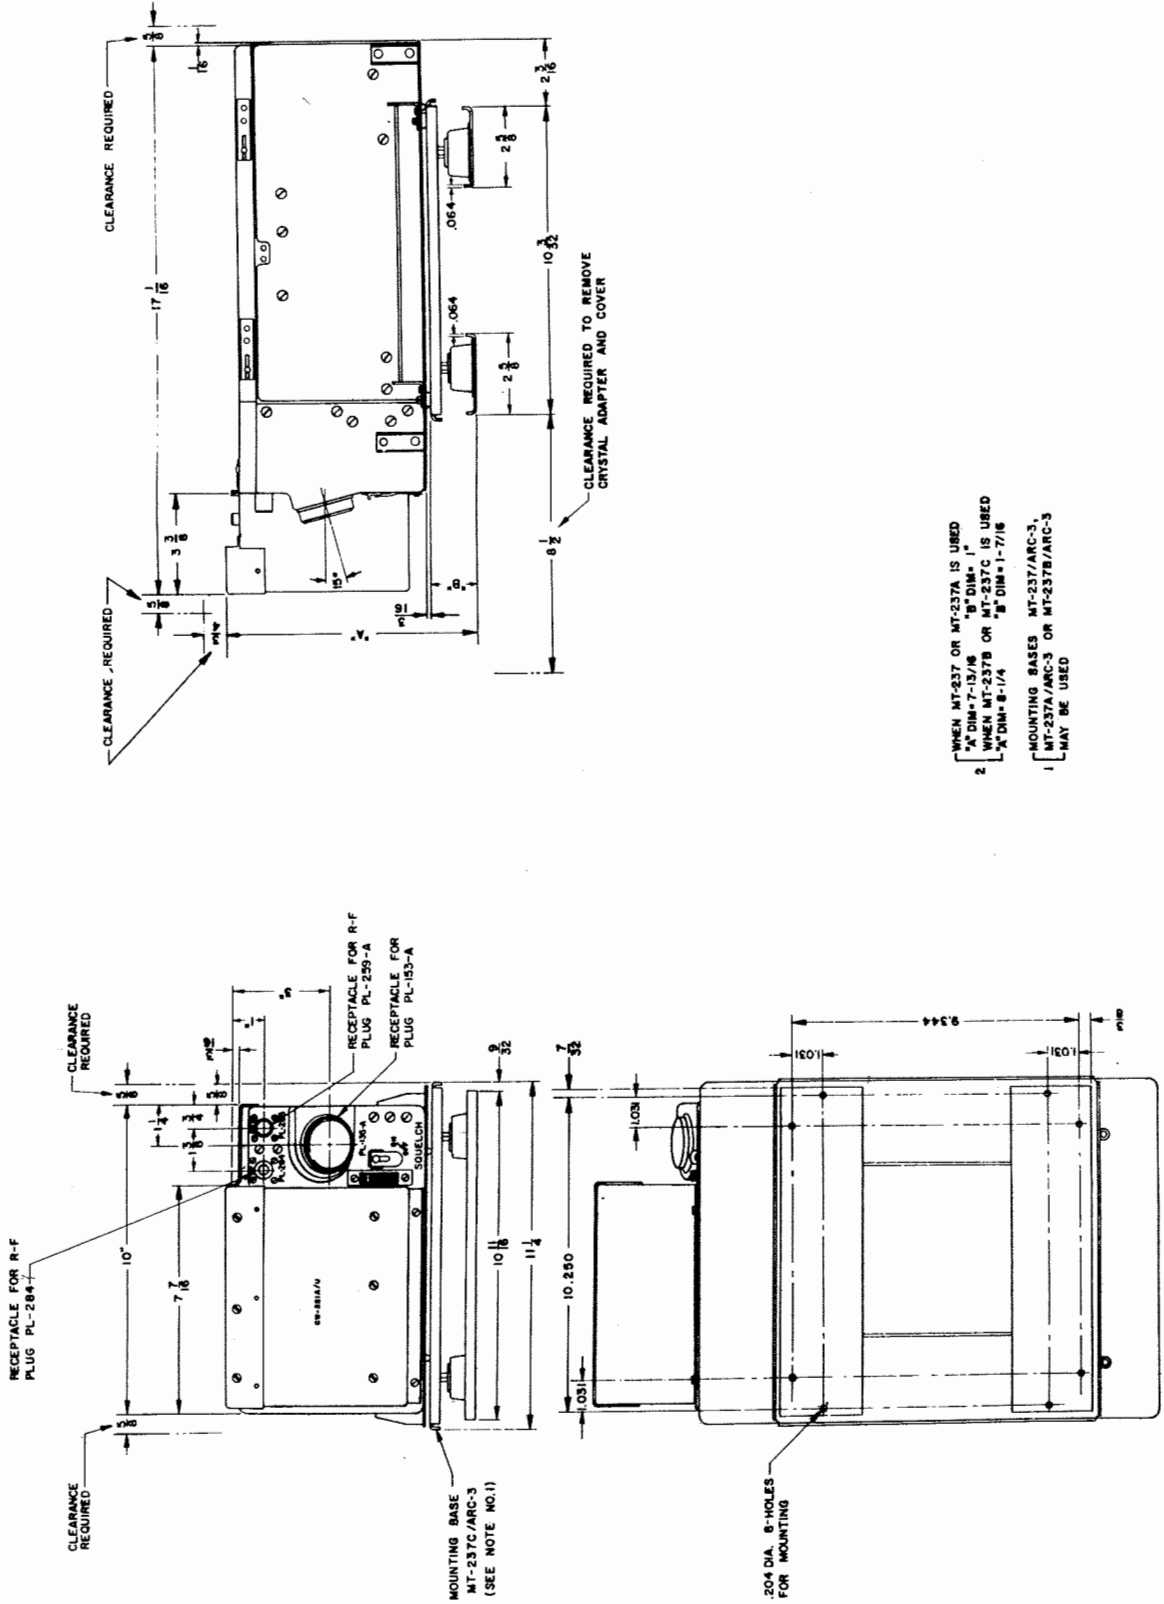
Radio Receiver R-428/ARC-36, R-428A/ARC-36 or R-428B/ARC-36—Outline Drawing and Mounting Dimensions
